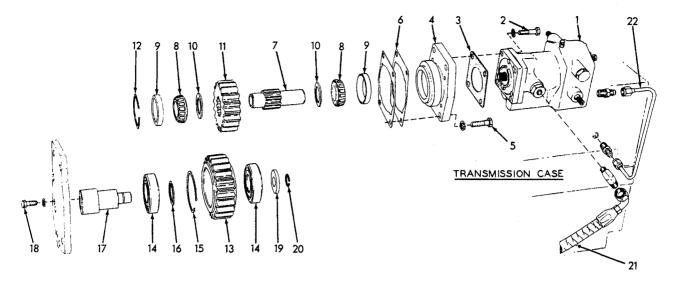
Travel Speed Governor Drive (T-70911)
